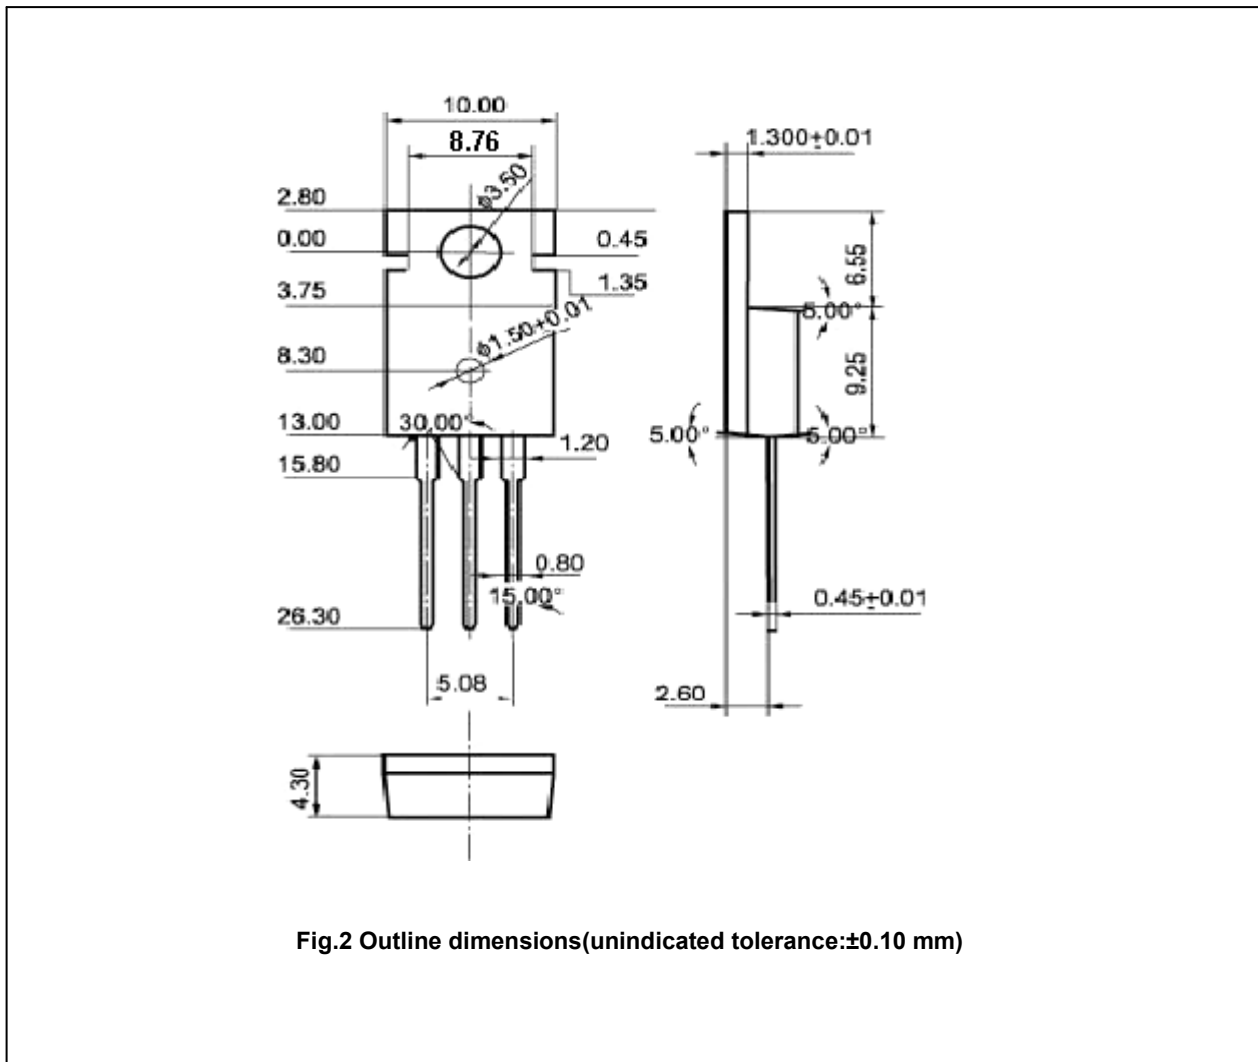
Outline dimensions(unindicated tolerance:±0.10 mm)
